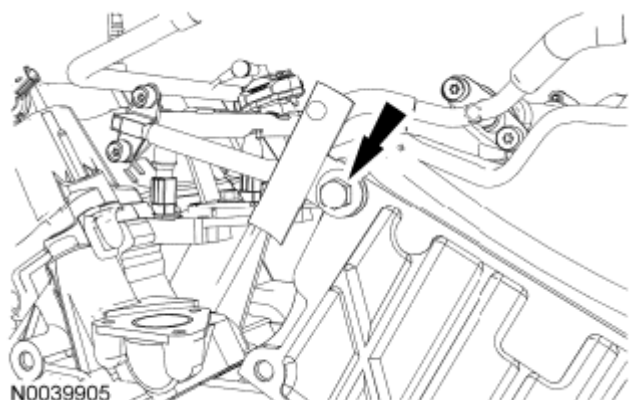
Locating Engine Wiring Harness Retainer Bolt
